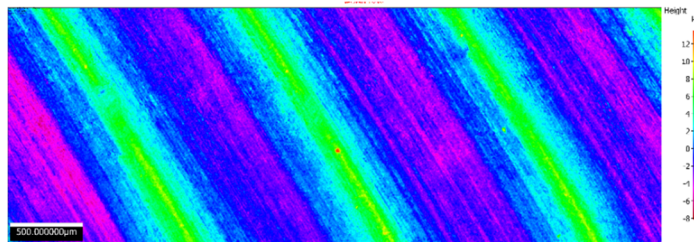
Surface topography of the machined IN718 with sharp tools:
